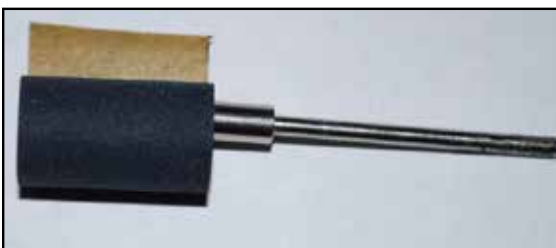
A split-shaft mandrel is suited for using abrasive flaps for polishing the inside radius of gun parts.
